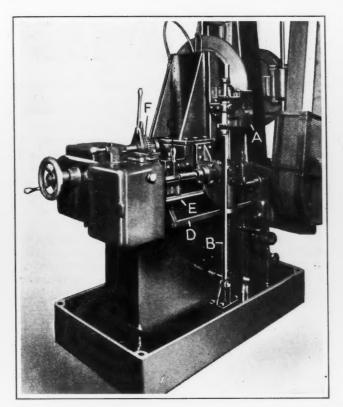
Gear-cutting Machine adapted for cutting the Slots in
